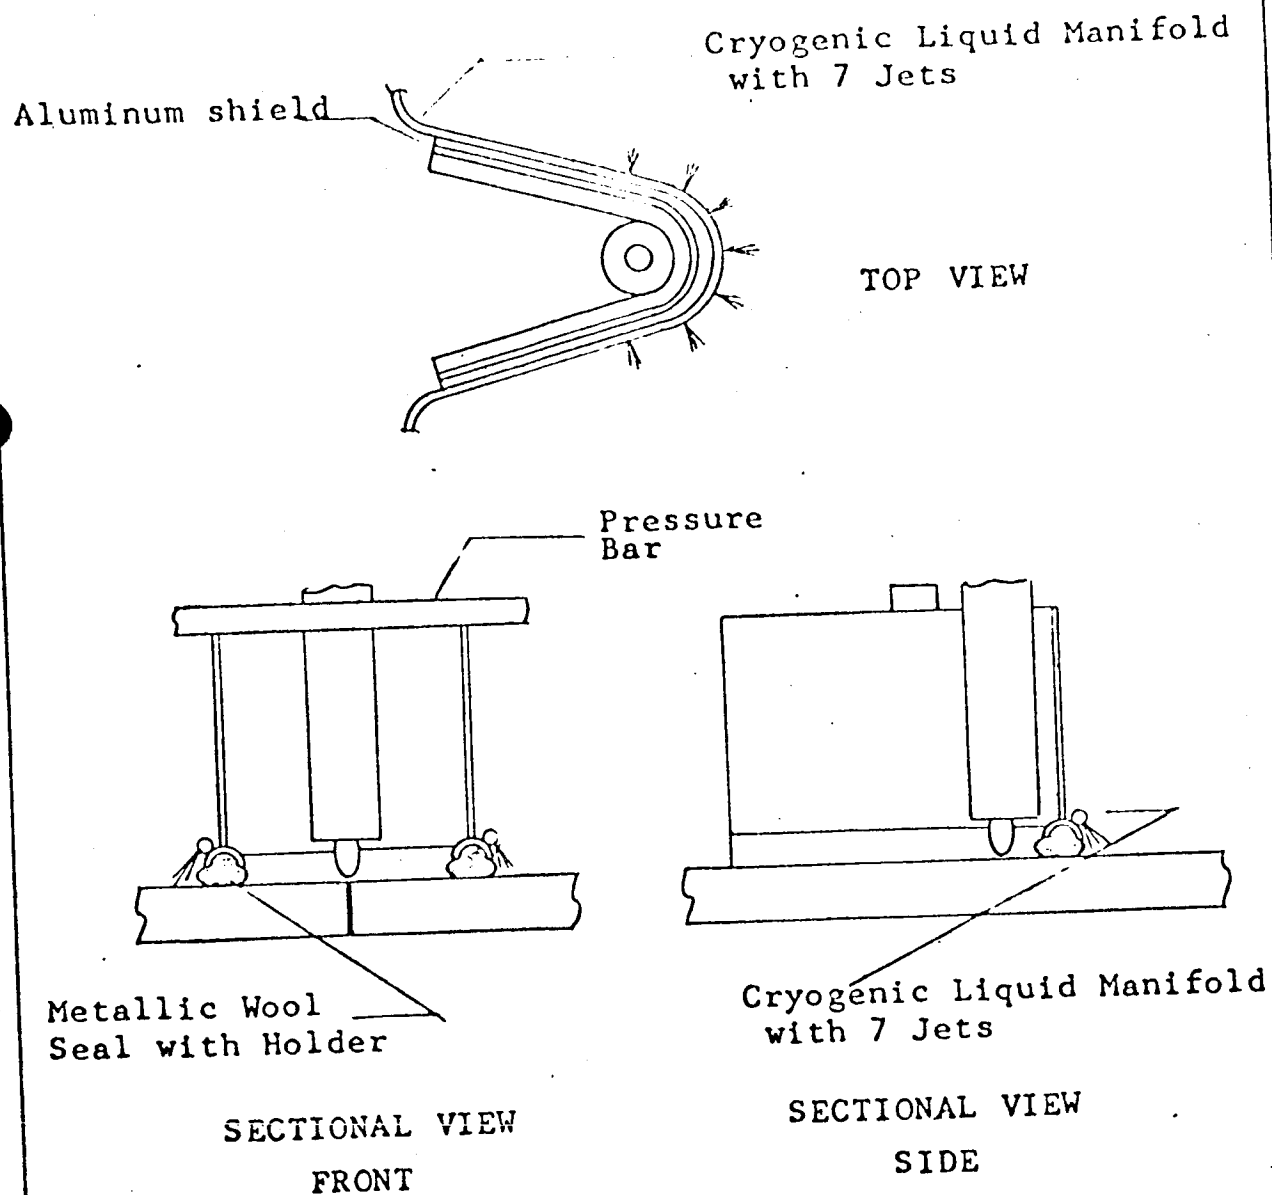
Jet System No. 9 for Front Side Chilling of Weldments using a Cryogenic Liquid — Traveling Shield with Metallic Wool Seal - 7 Jet Manifold
